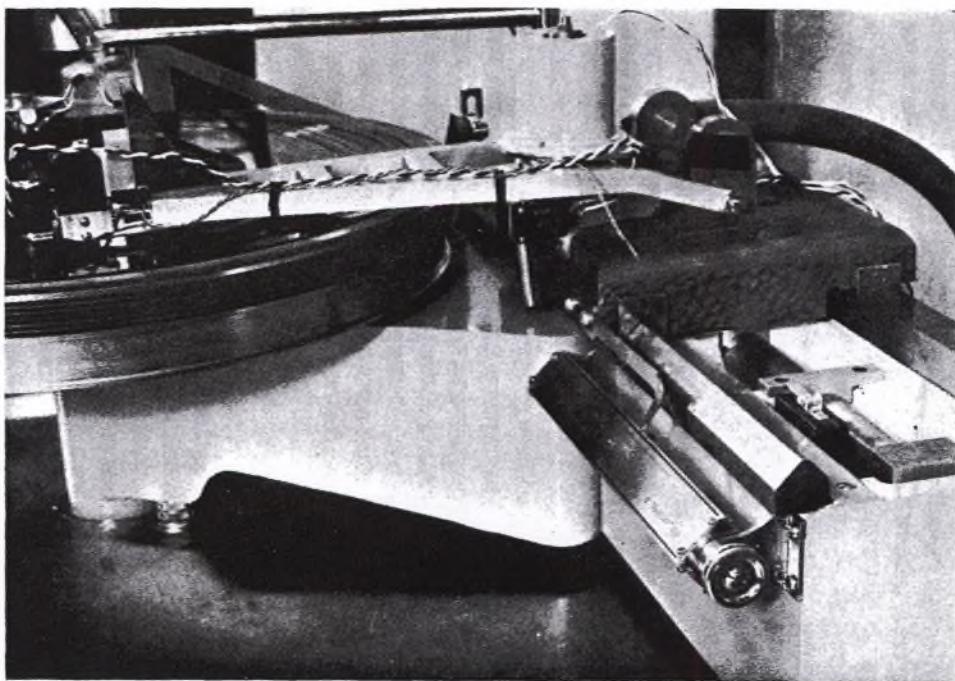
Cutter-bar assembly of the Hydrofeed lathe.
